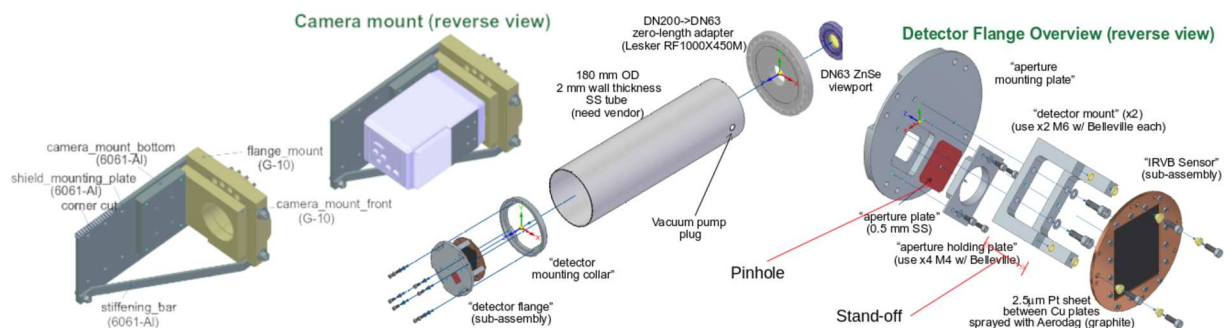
IRVB components overview: an exploded view showing all internal components before welding and assembly.
